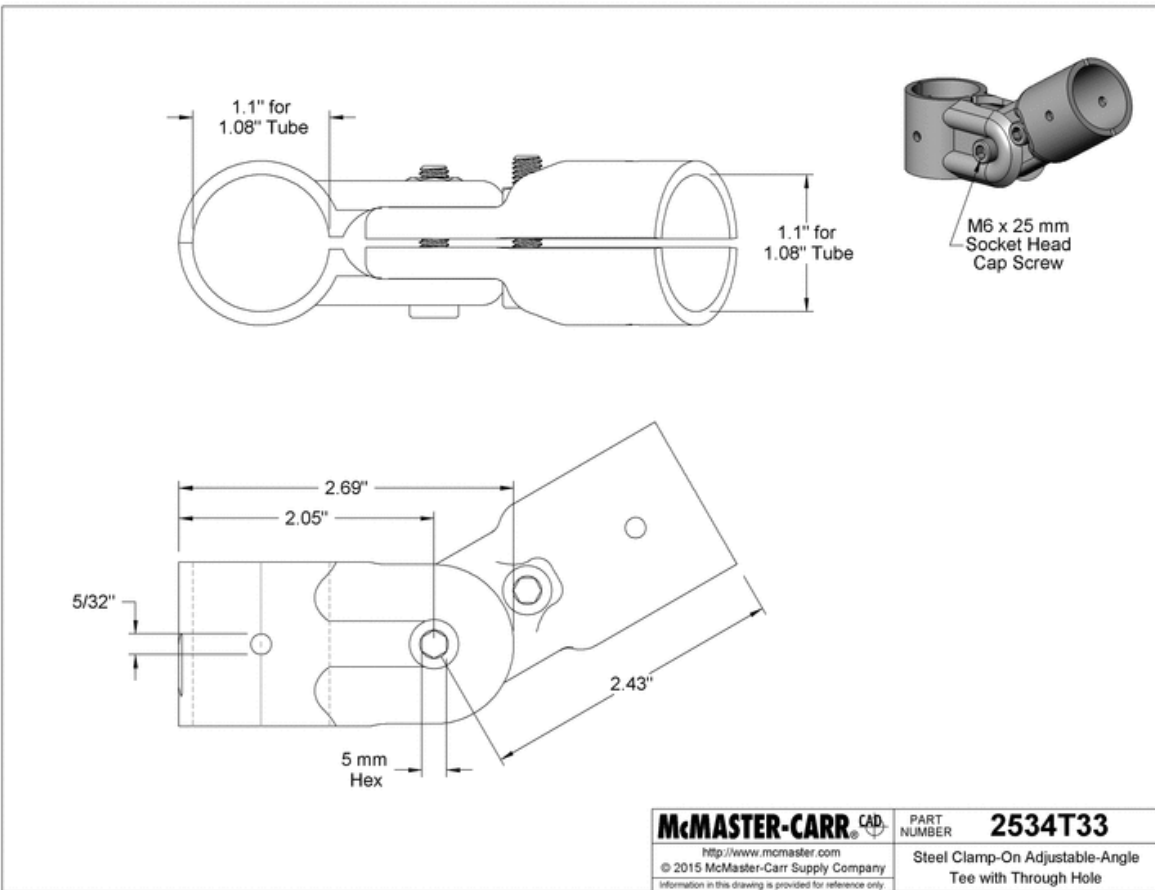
Adjustable Angle Steel Clamp Engineering Drawing [28]
